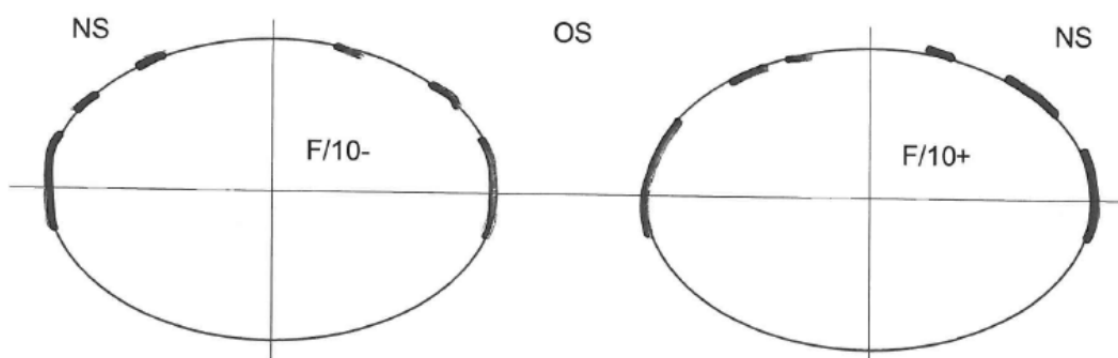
Fillet weld map diagram for band C/10.
